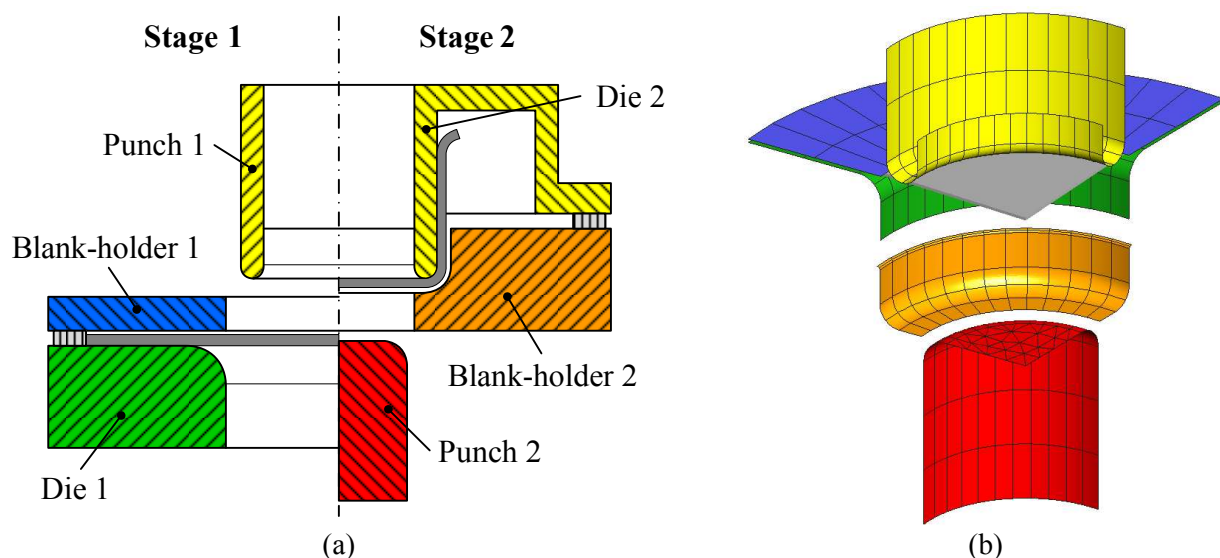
Reverse deep drawing process: (a) schematic drawing for stage 1 (left-hand side) and stage 2 (right-hand side); (b) tool surfaces described by Nagata patches and blank at initial position.
